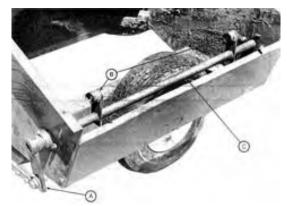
Rocker Arm Assembly for Shaker Pan Feed: (A) Rocker Arm, (B) Shaker Arms, (C) Shaker Shaft.
